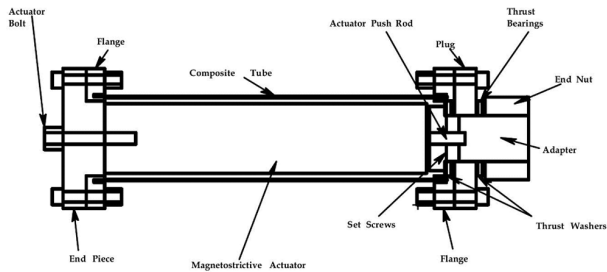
Schema of composite tube and magnetostrictive actuator assembly
